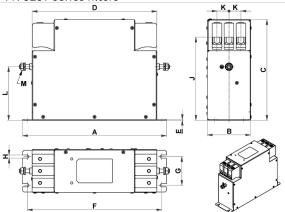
Dimension drawing of FN 3287 series filters (unit: mm)
